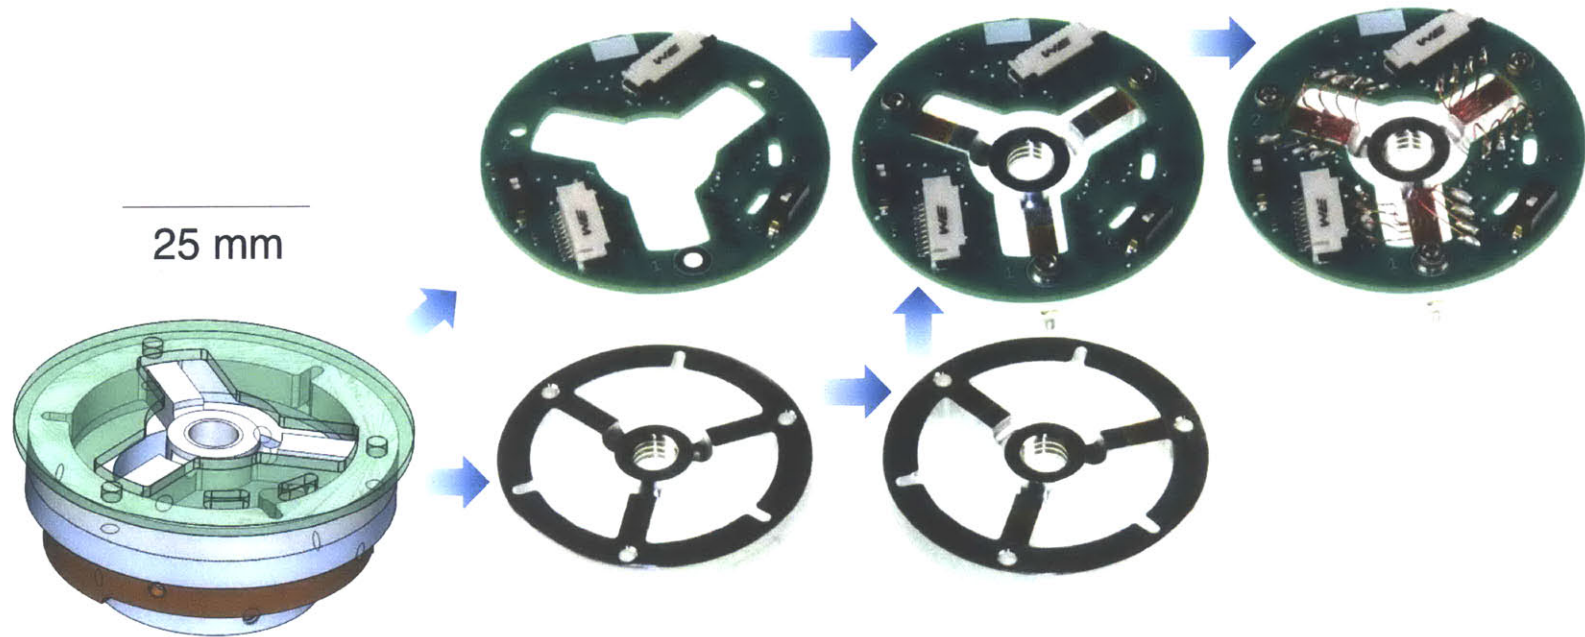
This image shows the components and steps required to build the revised sensor. The sensor included the strain relief PCB and flexure system. Once the PCB was populated and the gauges mounted on the flexure system, the two components could be connected electrically and mechanically.
